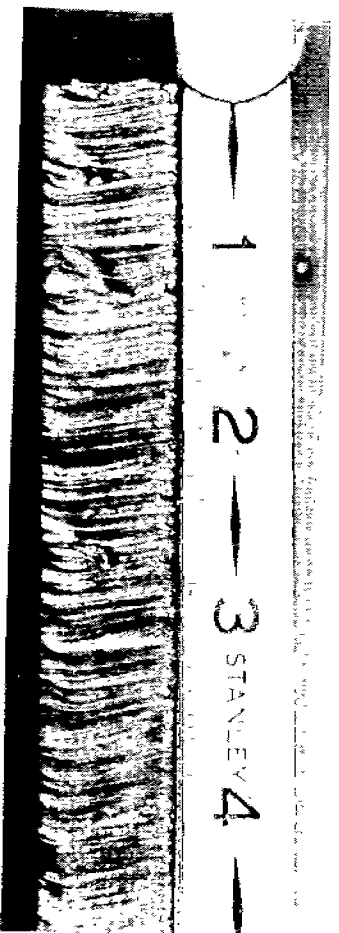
Edge and Fracture Views, Hand Guided Flame Cut Specimen
